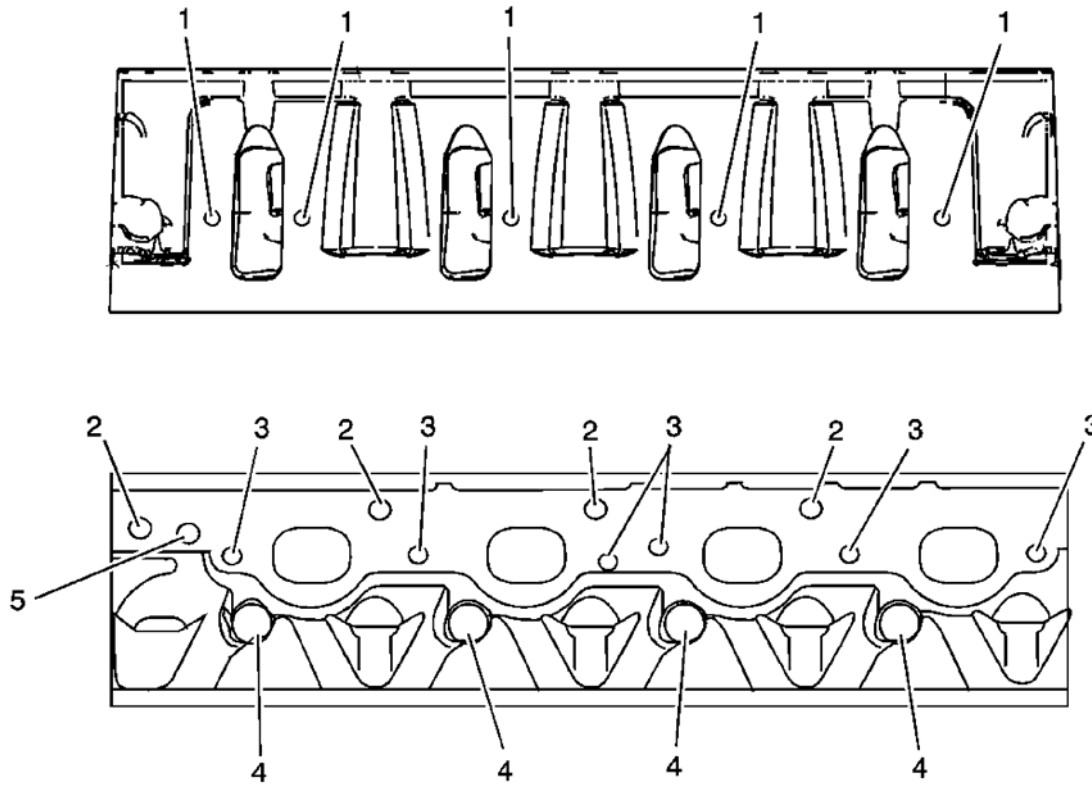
Cylinder Head - Intake/Exhaust Side Views
